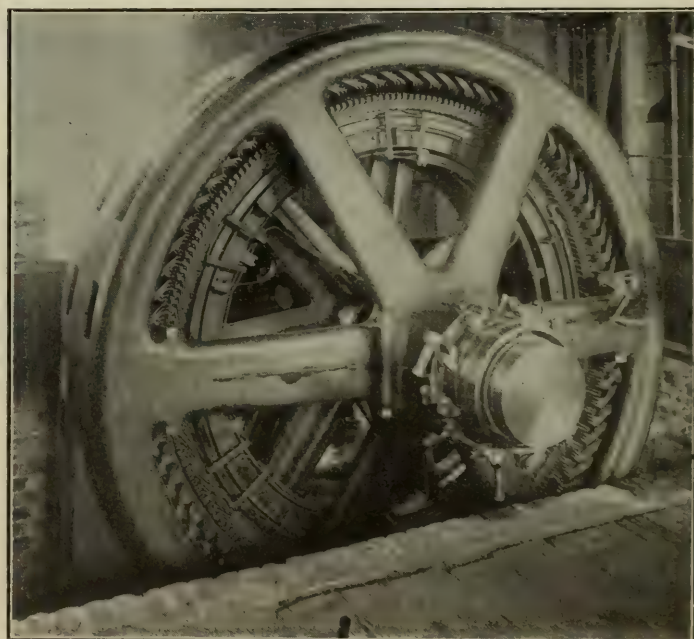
450-HP MOTOR DIRECT CONNECTED TO SHEET MILL TRAIN.
